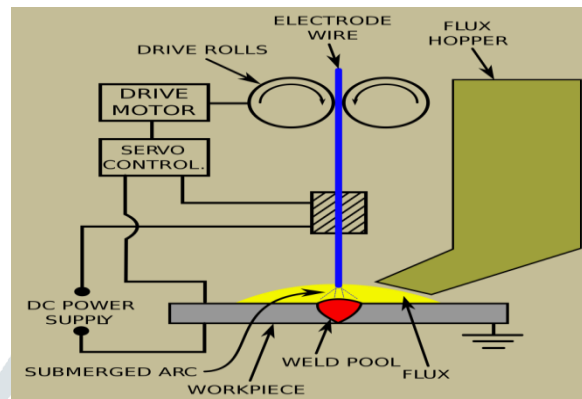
Schematic of Submerged Arc Welding (SAW)
